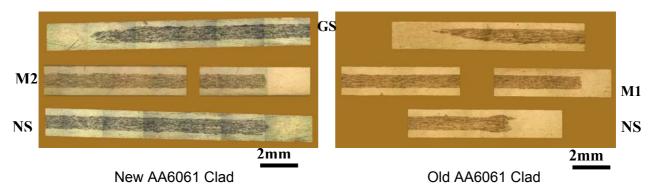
The shape of the fuel core (U₃O₈ + AI) and AA6061 Clad
